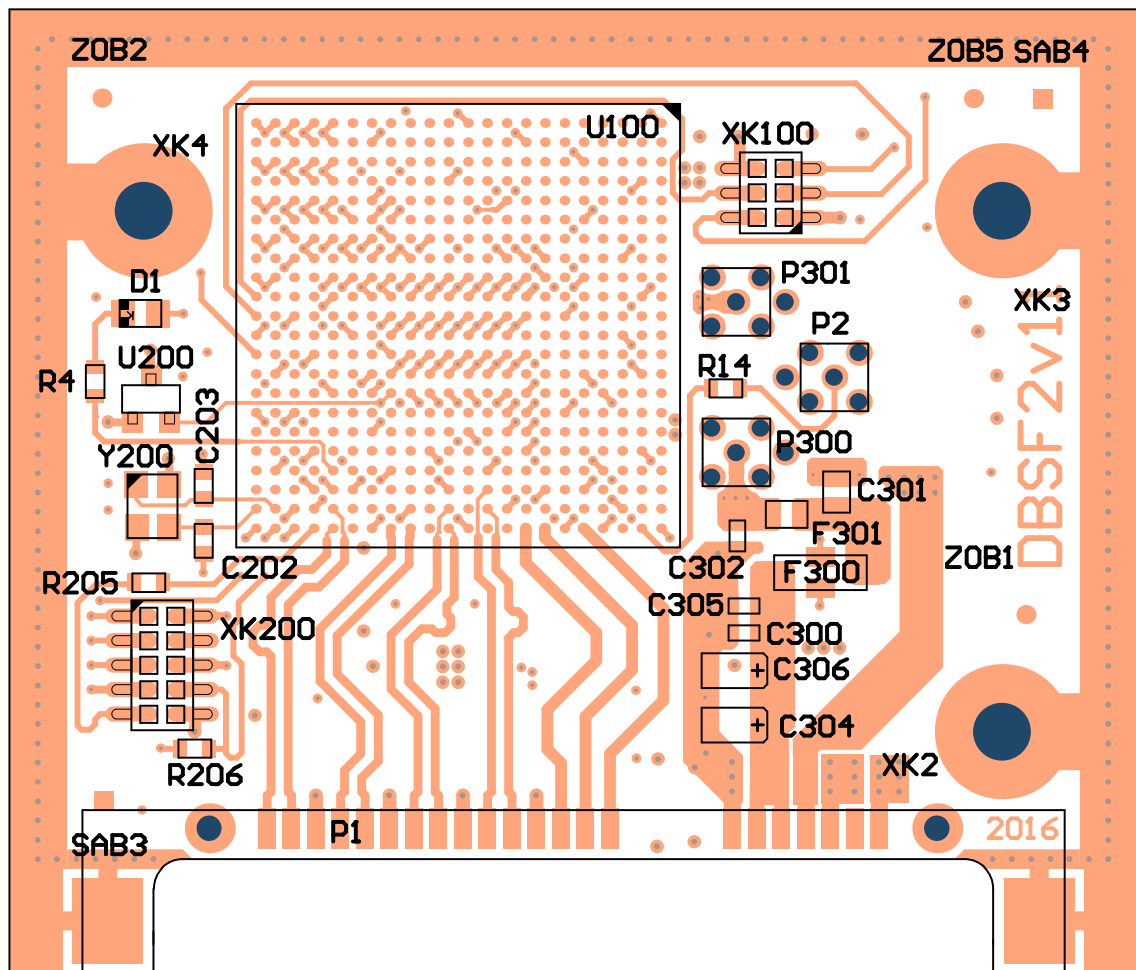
27 Daughter board SF2 composite drawing - Top layer
